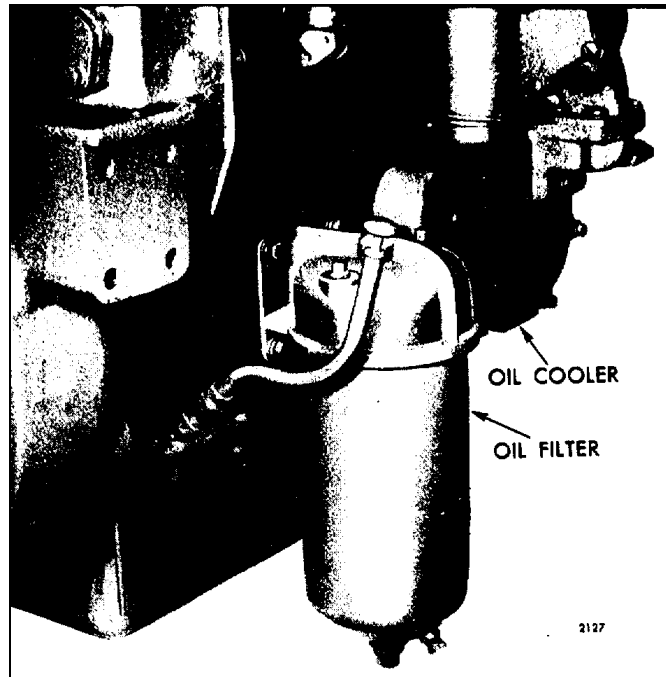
Typical In-Line Engine Oil Filter Mounting
